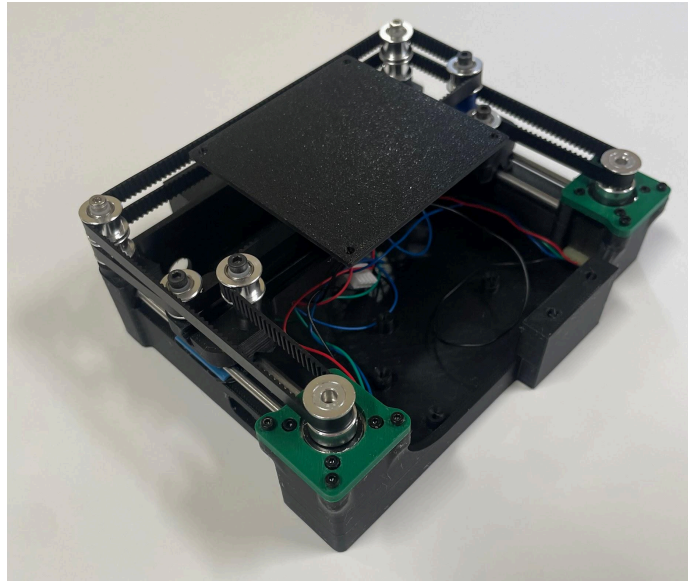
Final Prototype for X-Y Axis of Linear Rod Design Isometric View
